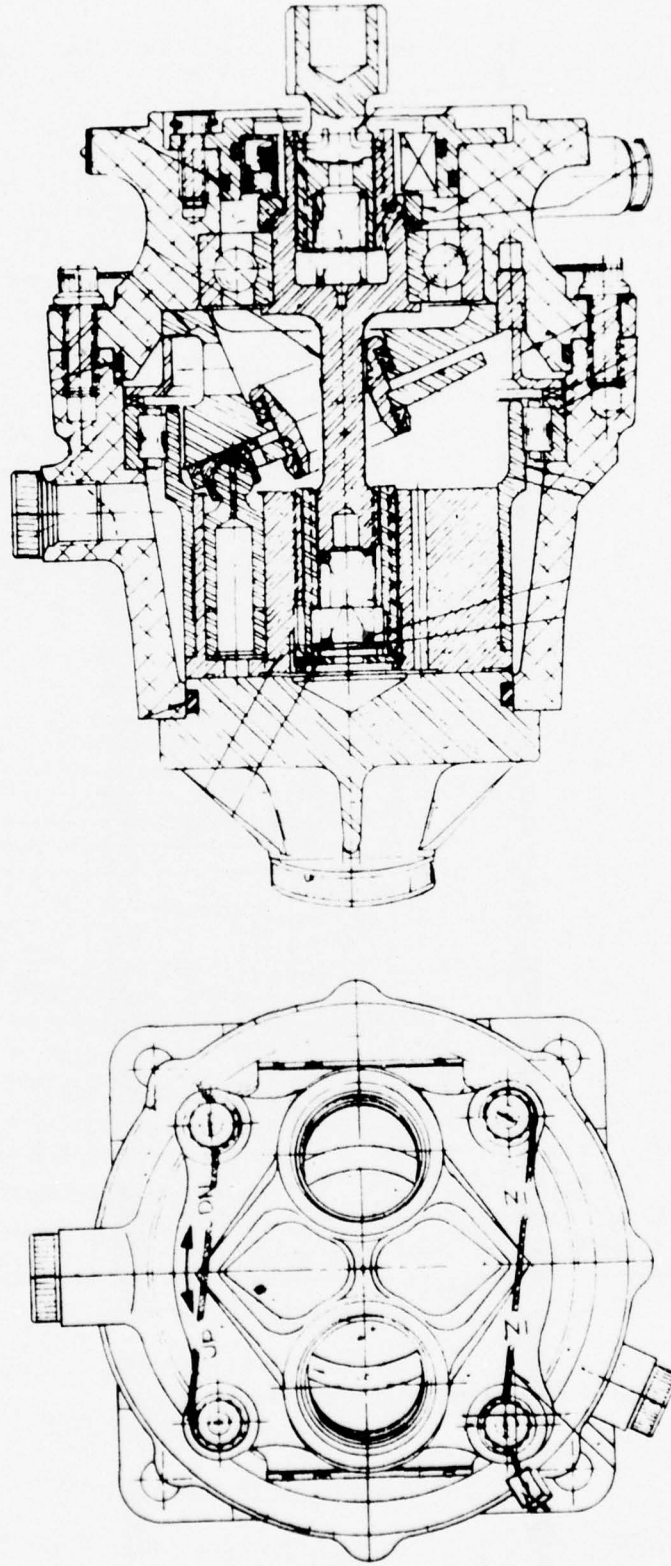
Hydraulic Motor, Abex Model AM8C-2
